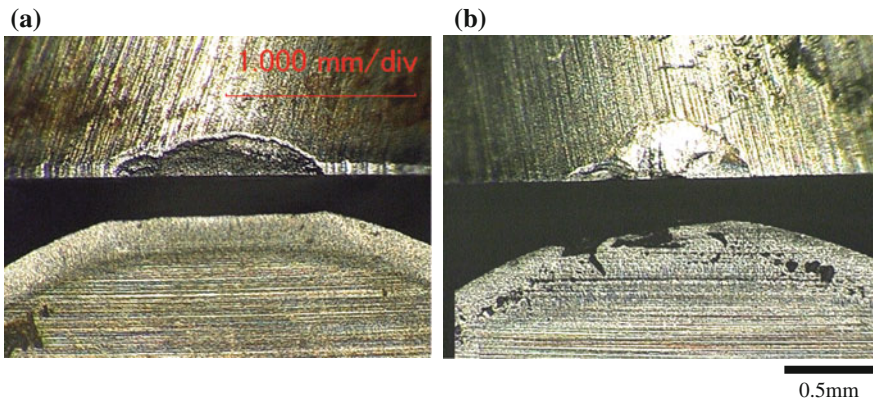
Appearances of chipping (*upper relief face, lower rake face*) (a) P20, $\ell = 5.9$ m (b) K20, $\ell = 0.7$ m
